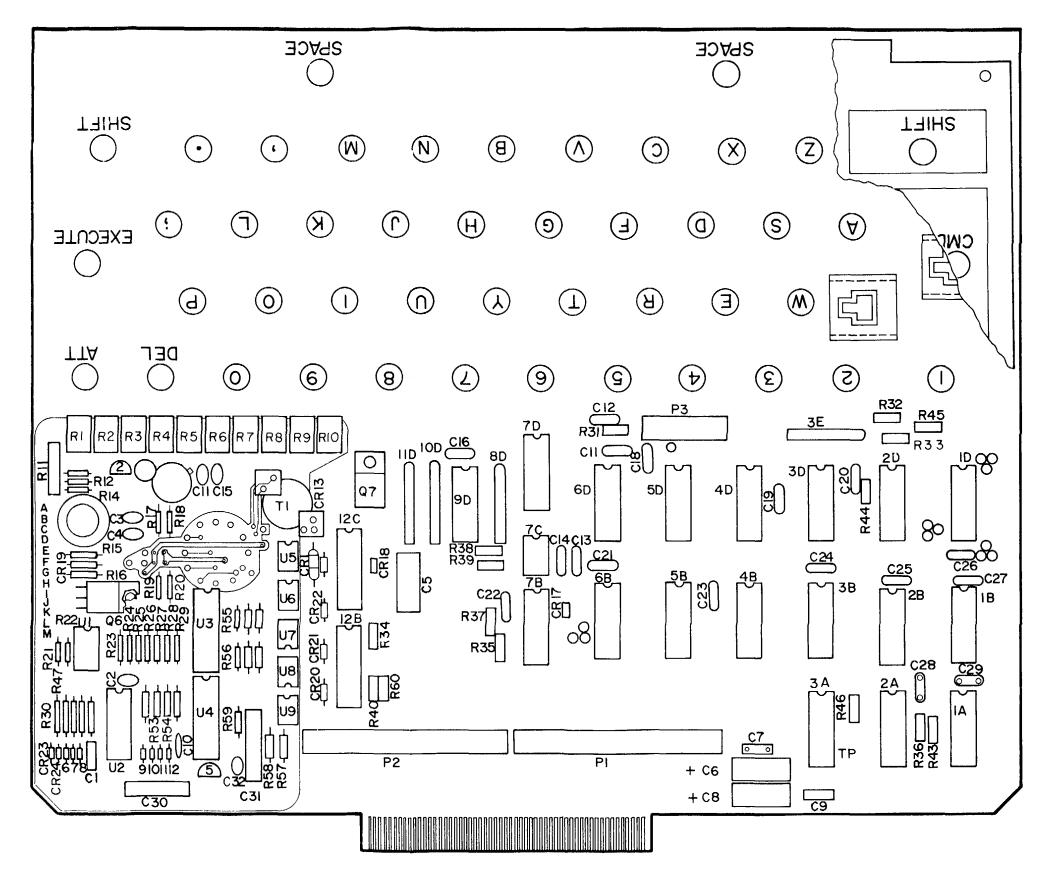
Panel Board 0100-2701 Assembly Drawing
